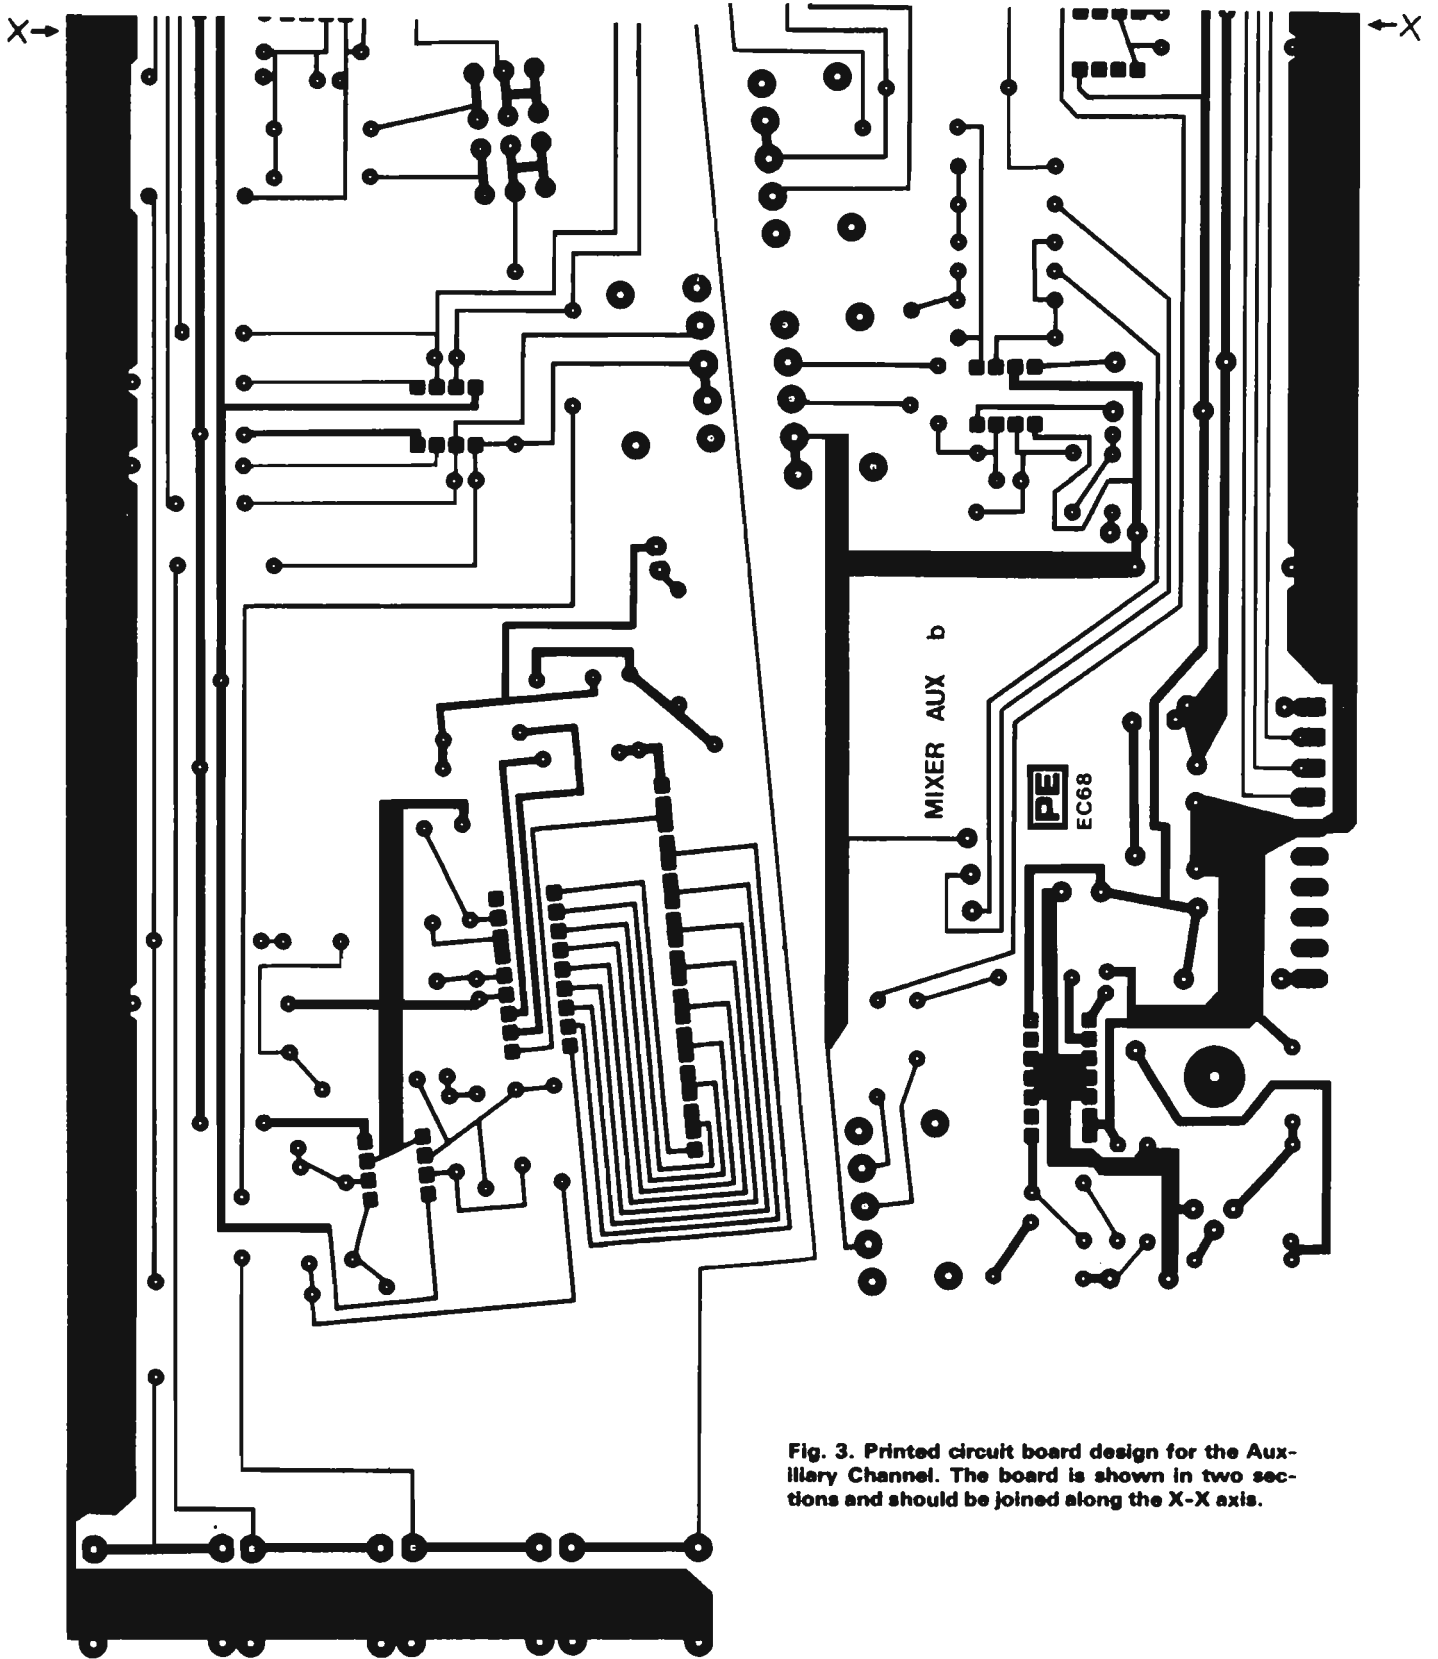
Printed circuit board design for the Auxiliary Channel. The board is shown in two sections and should be joined along the X-X axis.
